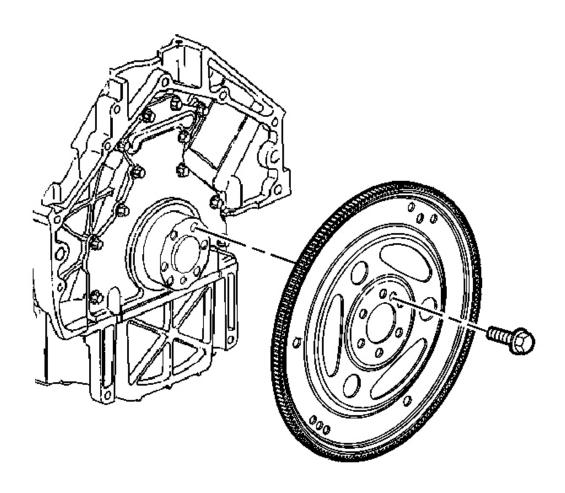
Engine Flywheel Courtesy of GENERAL MOTORS CORP.
